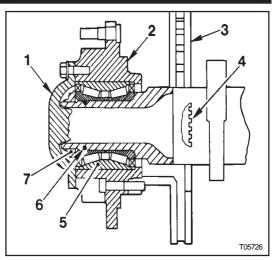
Section through wheel end of an axle with previous type "unified" bearing
